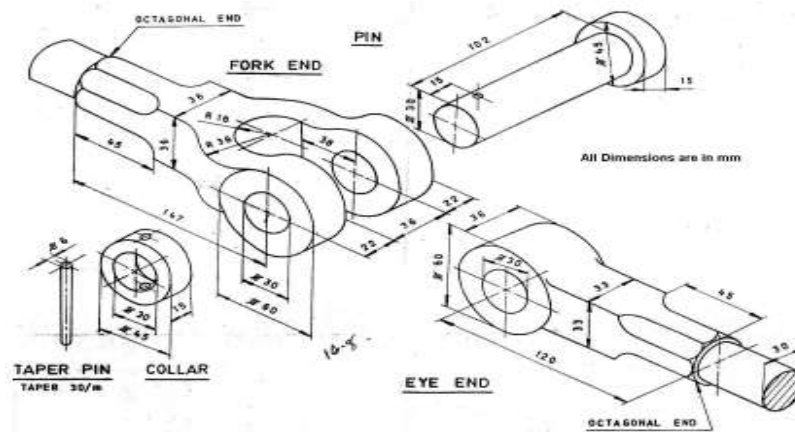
A: Knuckle Joint Parts with dimensions- CAD Model
